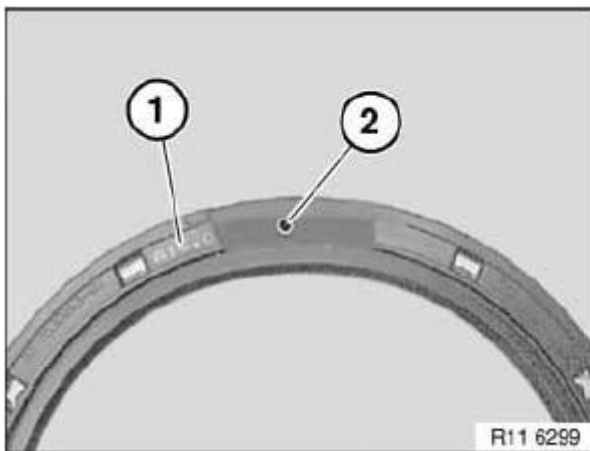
Identifying Radial Seal Rubber Coating And Removal Opening
